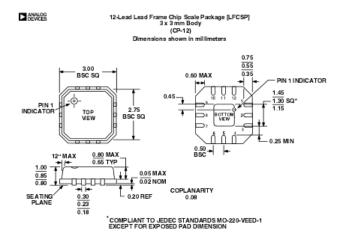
12-Lead Frame Chip Scale package [LFCSP] (CP-12)—Dimensions shown in millimeters
